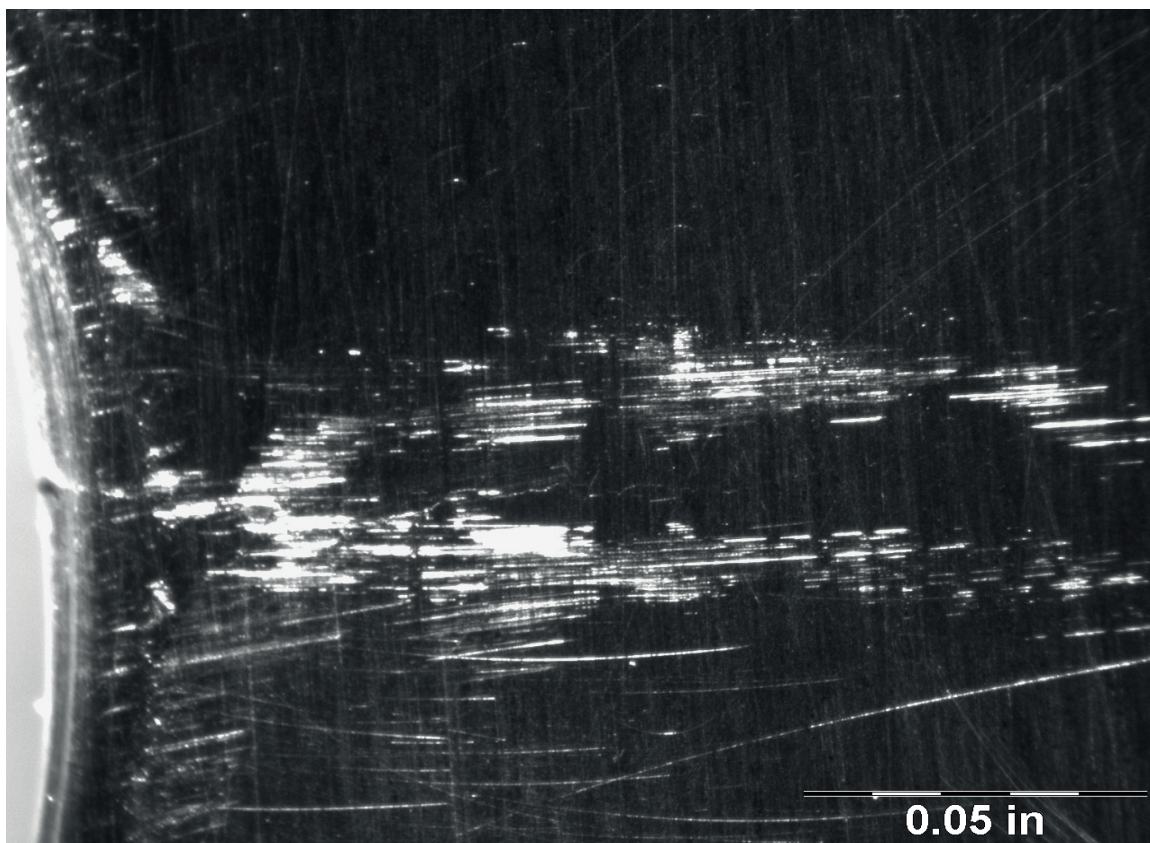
Image of Surface Crack in Coupon Cx4N1-06-B, Surface Crack Length is 0.1214 inch.
